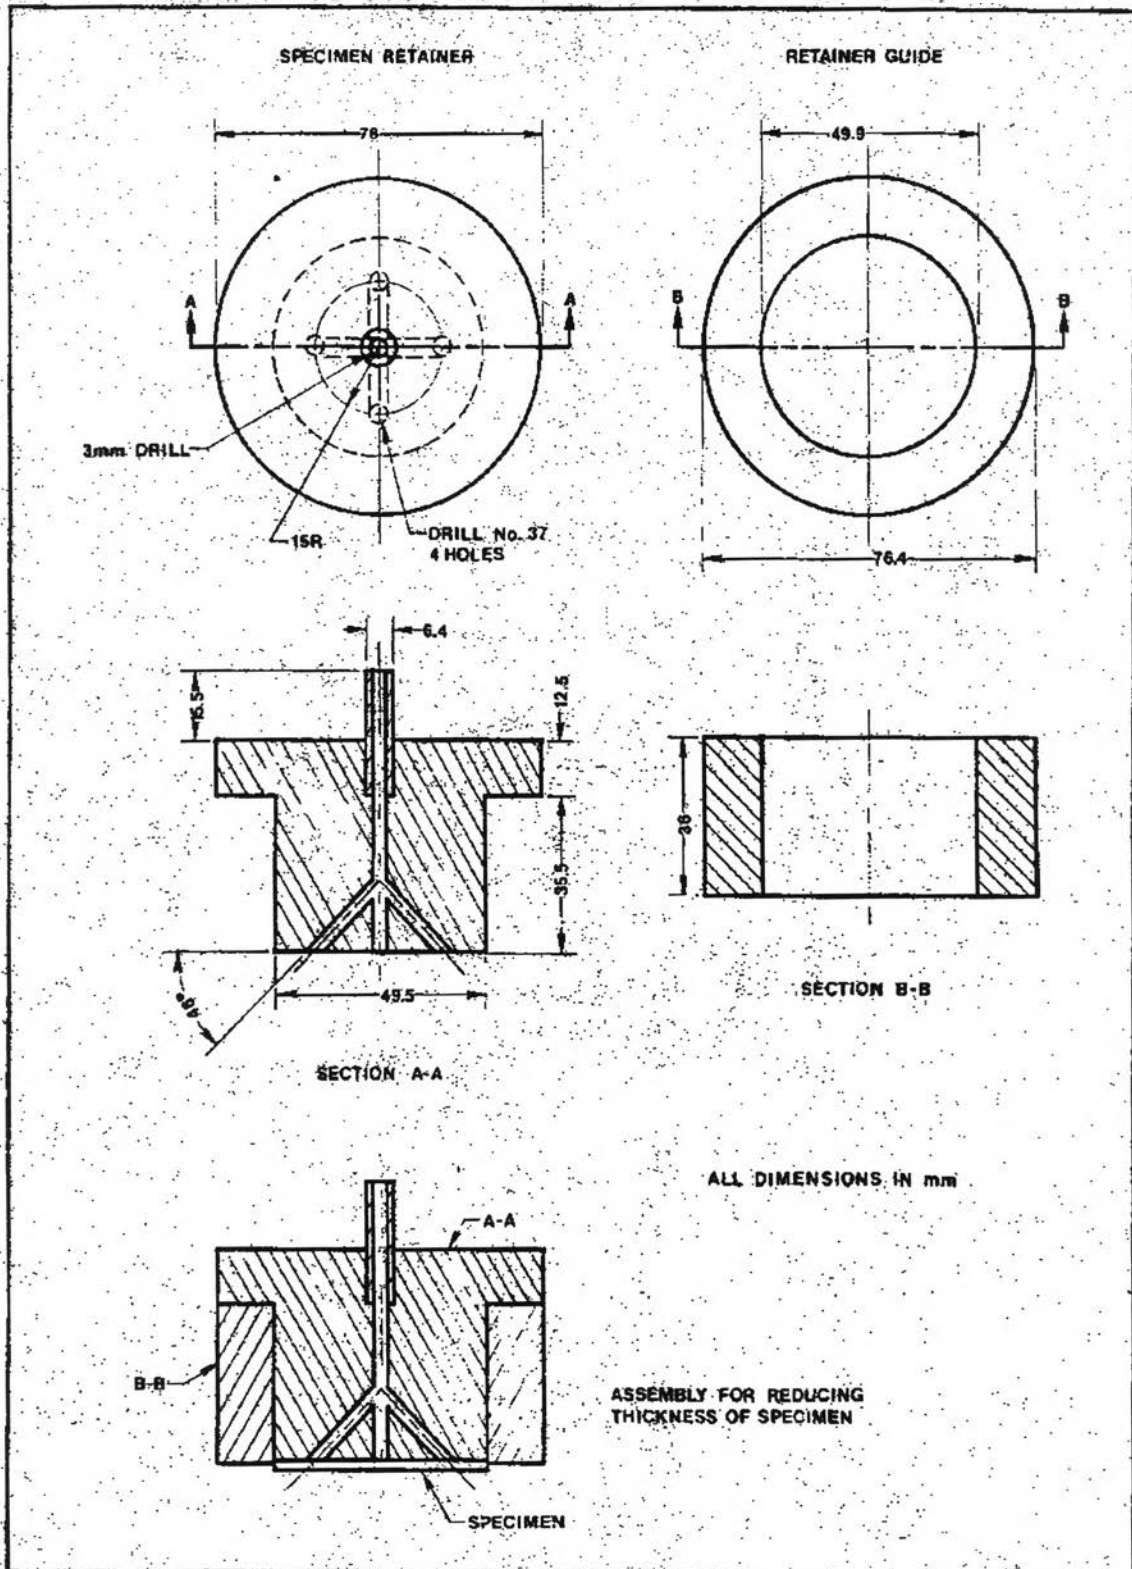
Assembly for holding specimen during deduction for thickness. Specimen retainer of brass. Retainer guide of stainless steel. All dimensions in millimeters.
